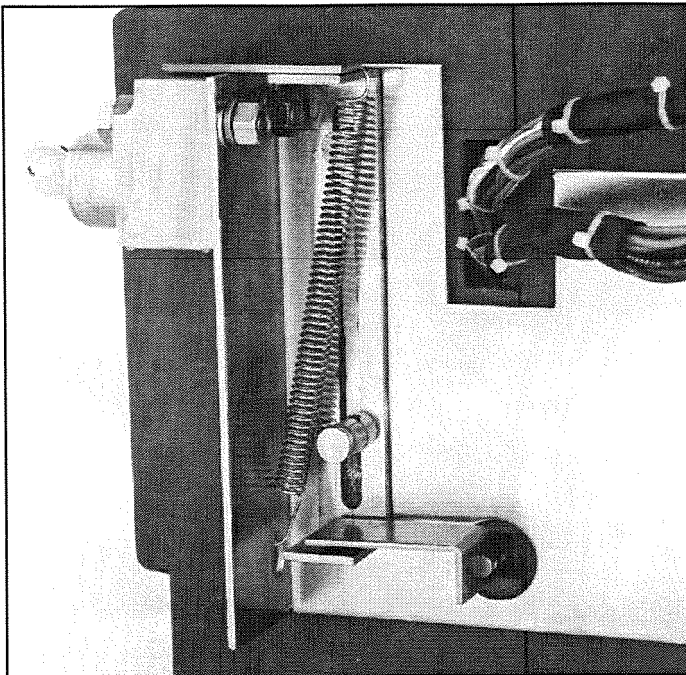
Rear View of Installed Key Interlock and Linkage Kit on Fixed Mounted Breaker
